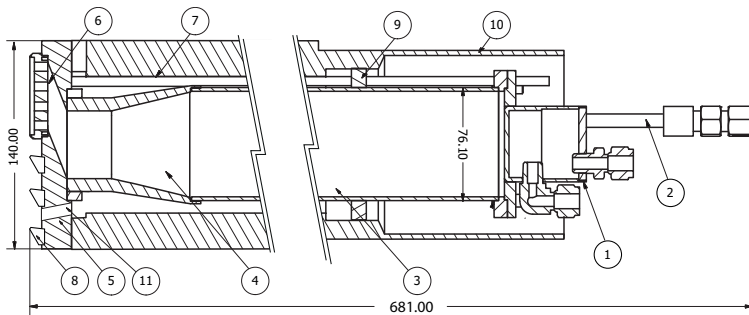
Drawing of the hybrid drill head with its main dimensions. (1) Burner, (2) igniter tube, (3) combustion chamber, (4) nozzle, (5) drill bit face, (6) distribution box, (7) air supply, (8) mechanical cutters, (9) vibration damper, (10) drill bit and (11) drilling mud nozzle.
